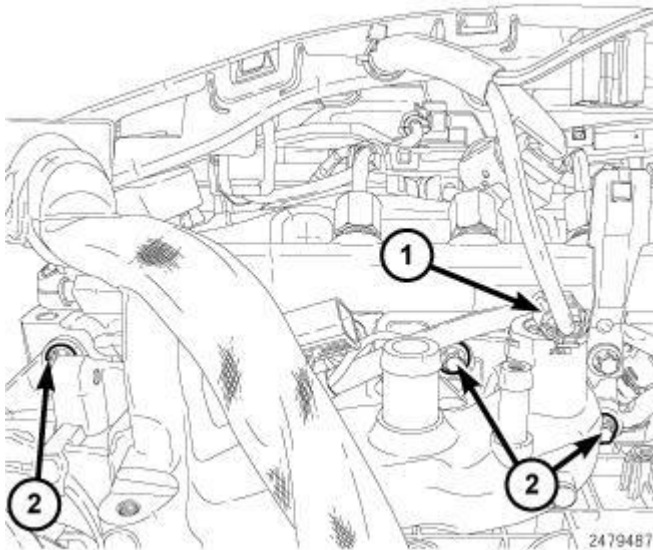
ECT Sensor Connector & Thermostat Housing Bolts
